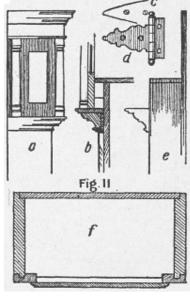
Alternative door. Fig. 11. Working details. (By arrangement with Evans Bros., Ltd, London)
